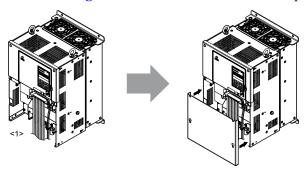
Reattaching the Terminal Cover on an IP00/Open Type Enclosure Drive
